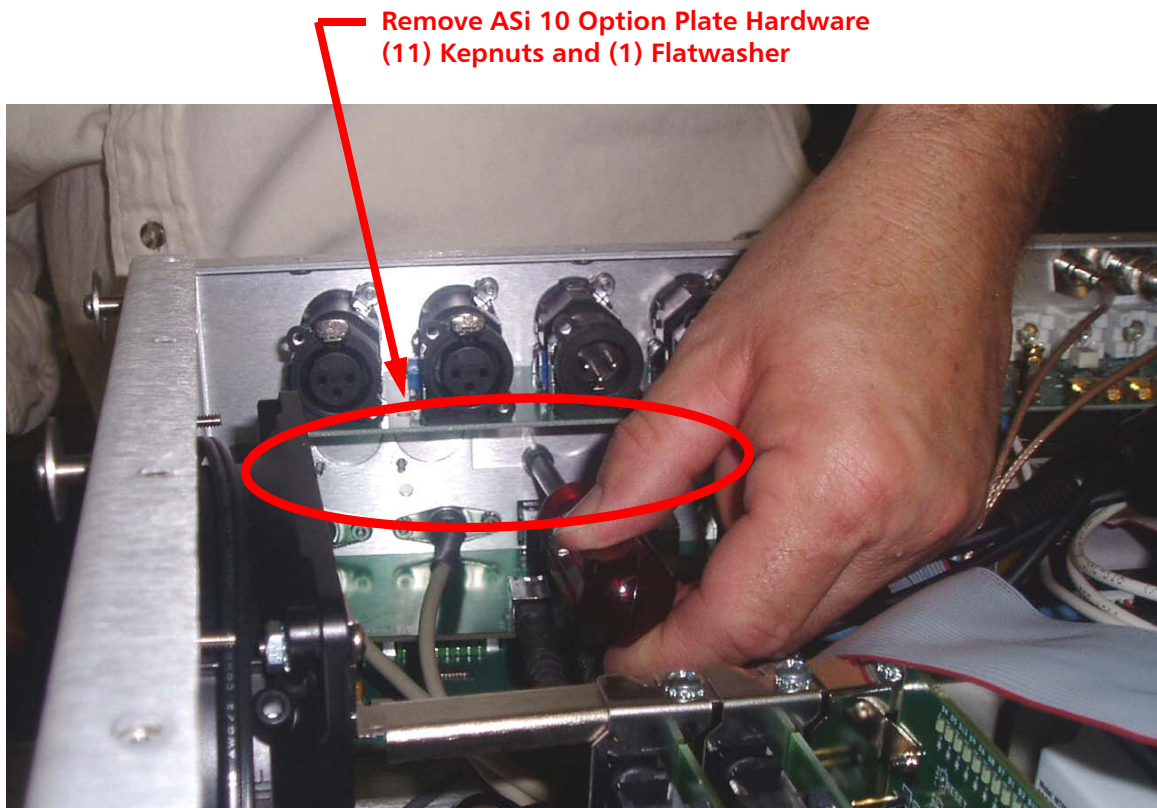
Removal of ASi 10 Option Plate (Hardware Located Inside Rear of Chassis)
